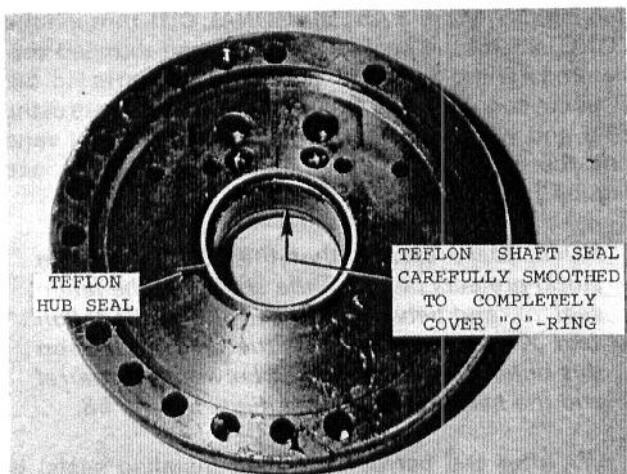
Preassembled Top Plate Prior to Assembly onto Barrel
